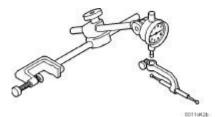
DIAL INDICATOR C-3339 Courtesy of CHRYSLER LLC
